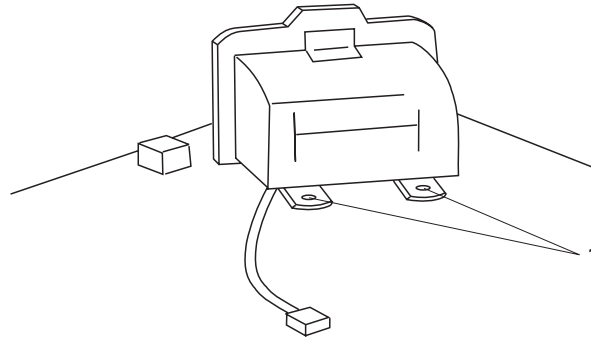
Battery Compartment Disassembly/Reassembly
